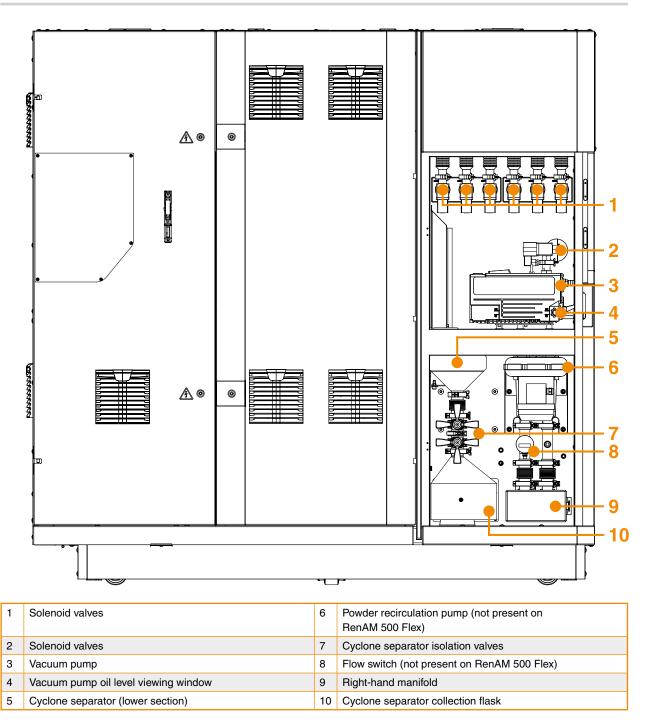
RenAM 500 rear view with rear right-hand cupboard door open
